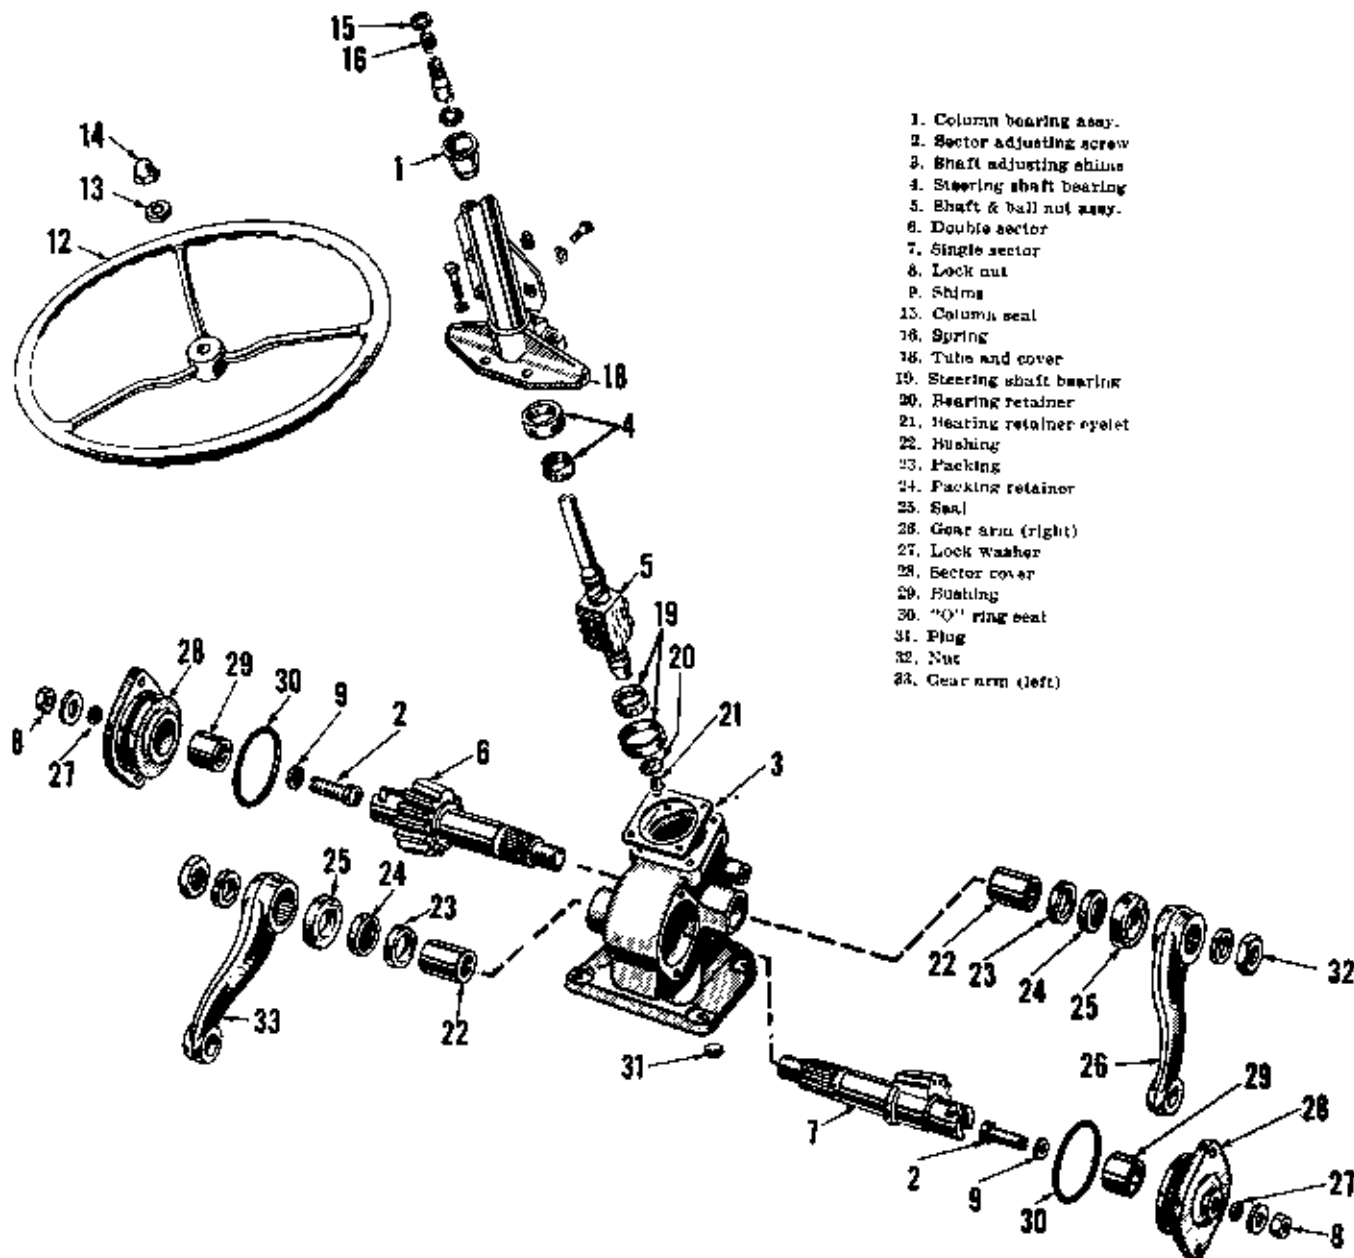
Exploded view of circulating ball nut steering gear used on model NAA tractors. Wormshaft bearing end play is adjusted by varying shims (3). Sector backlash is adjusted with adjusting screws (2).
